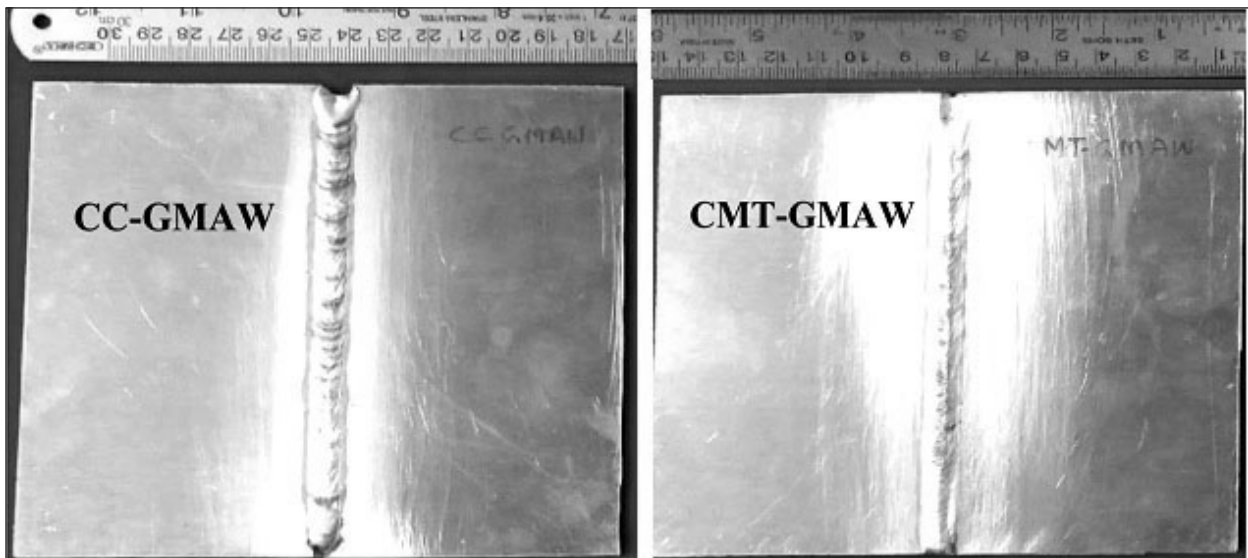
Photographs of the CC-GMAW and CMT-GMAW Joints
